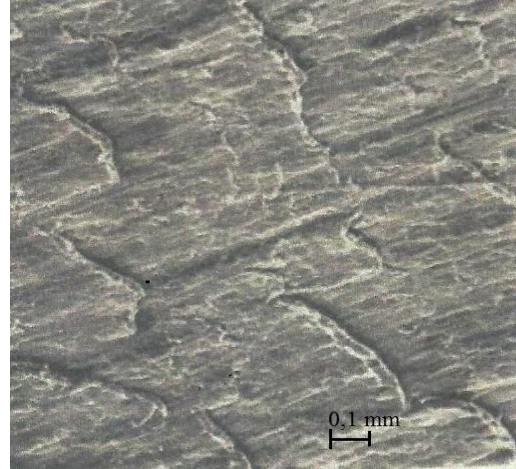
Surface with plastic deformation signs machined by rounded cutting edge tool [5]
